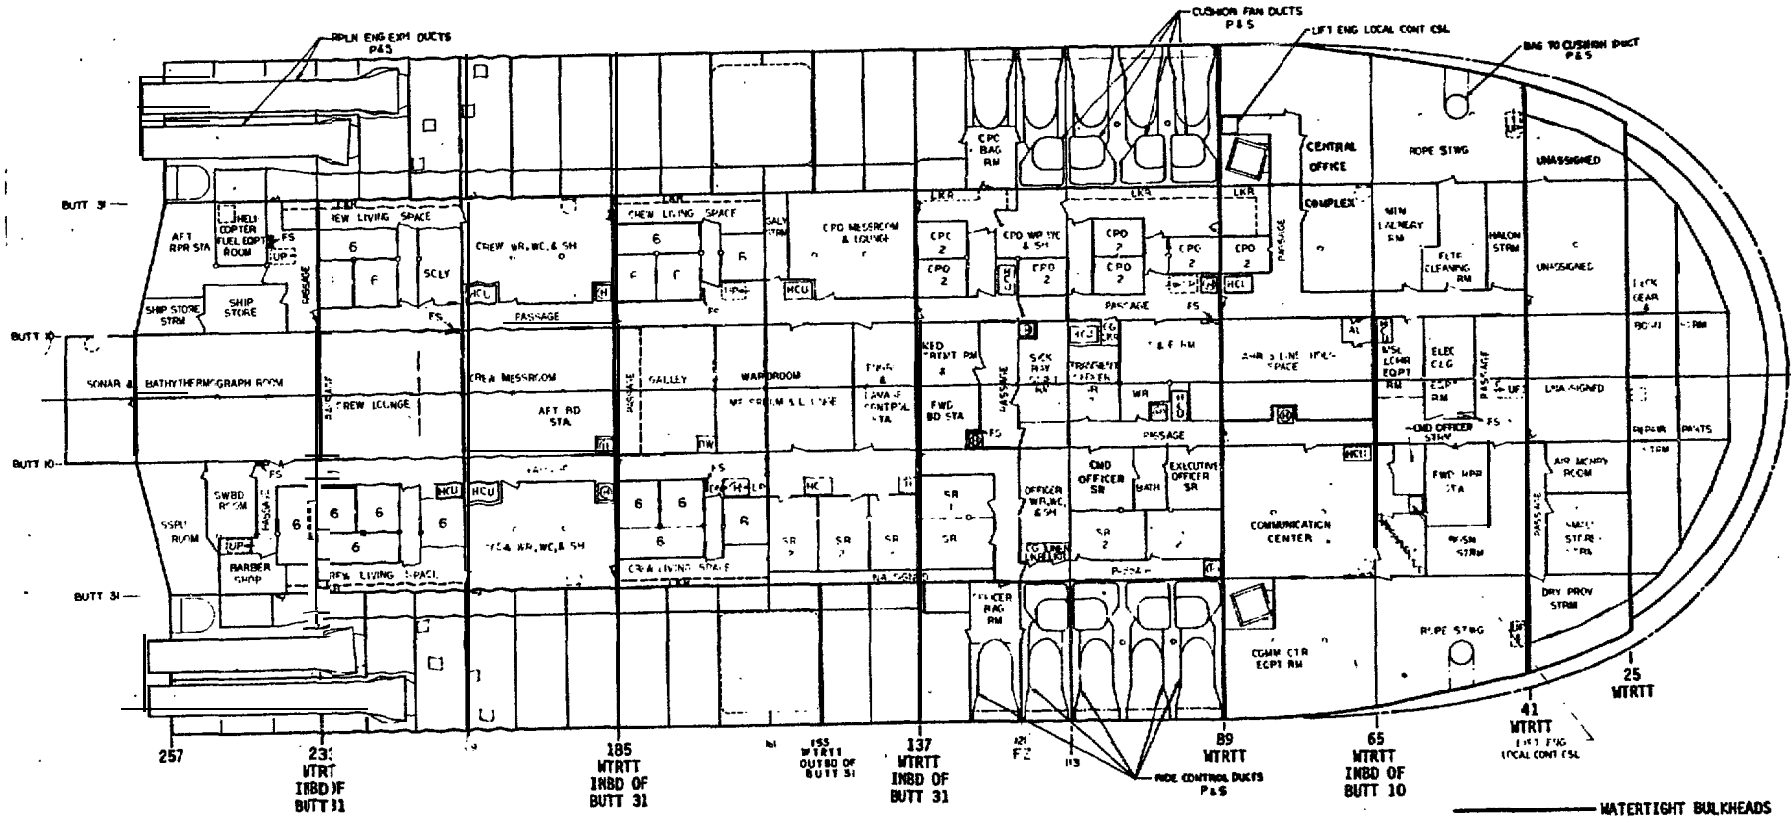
LOCATION OF WATERTIGHT BULKHEADS ON ND DECK
